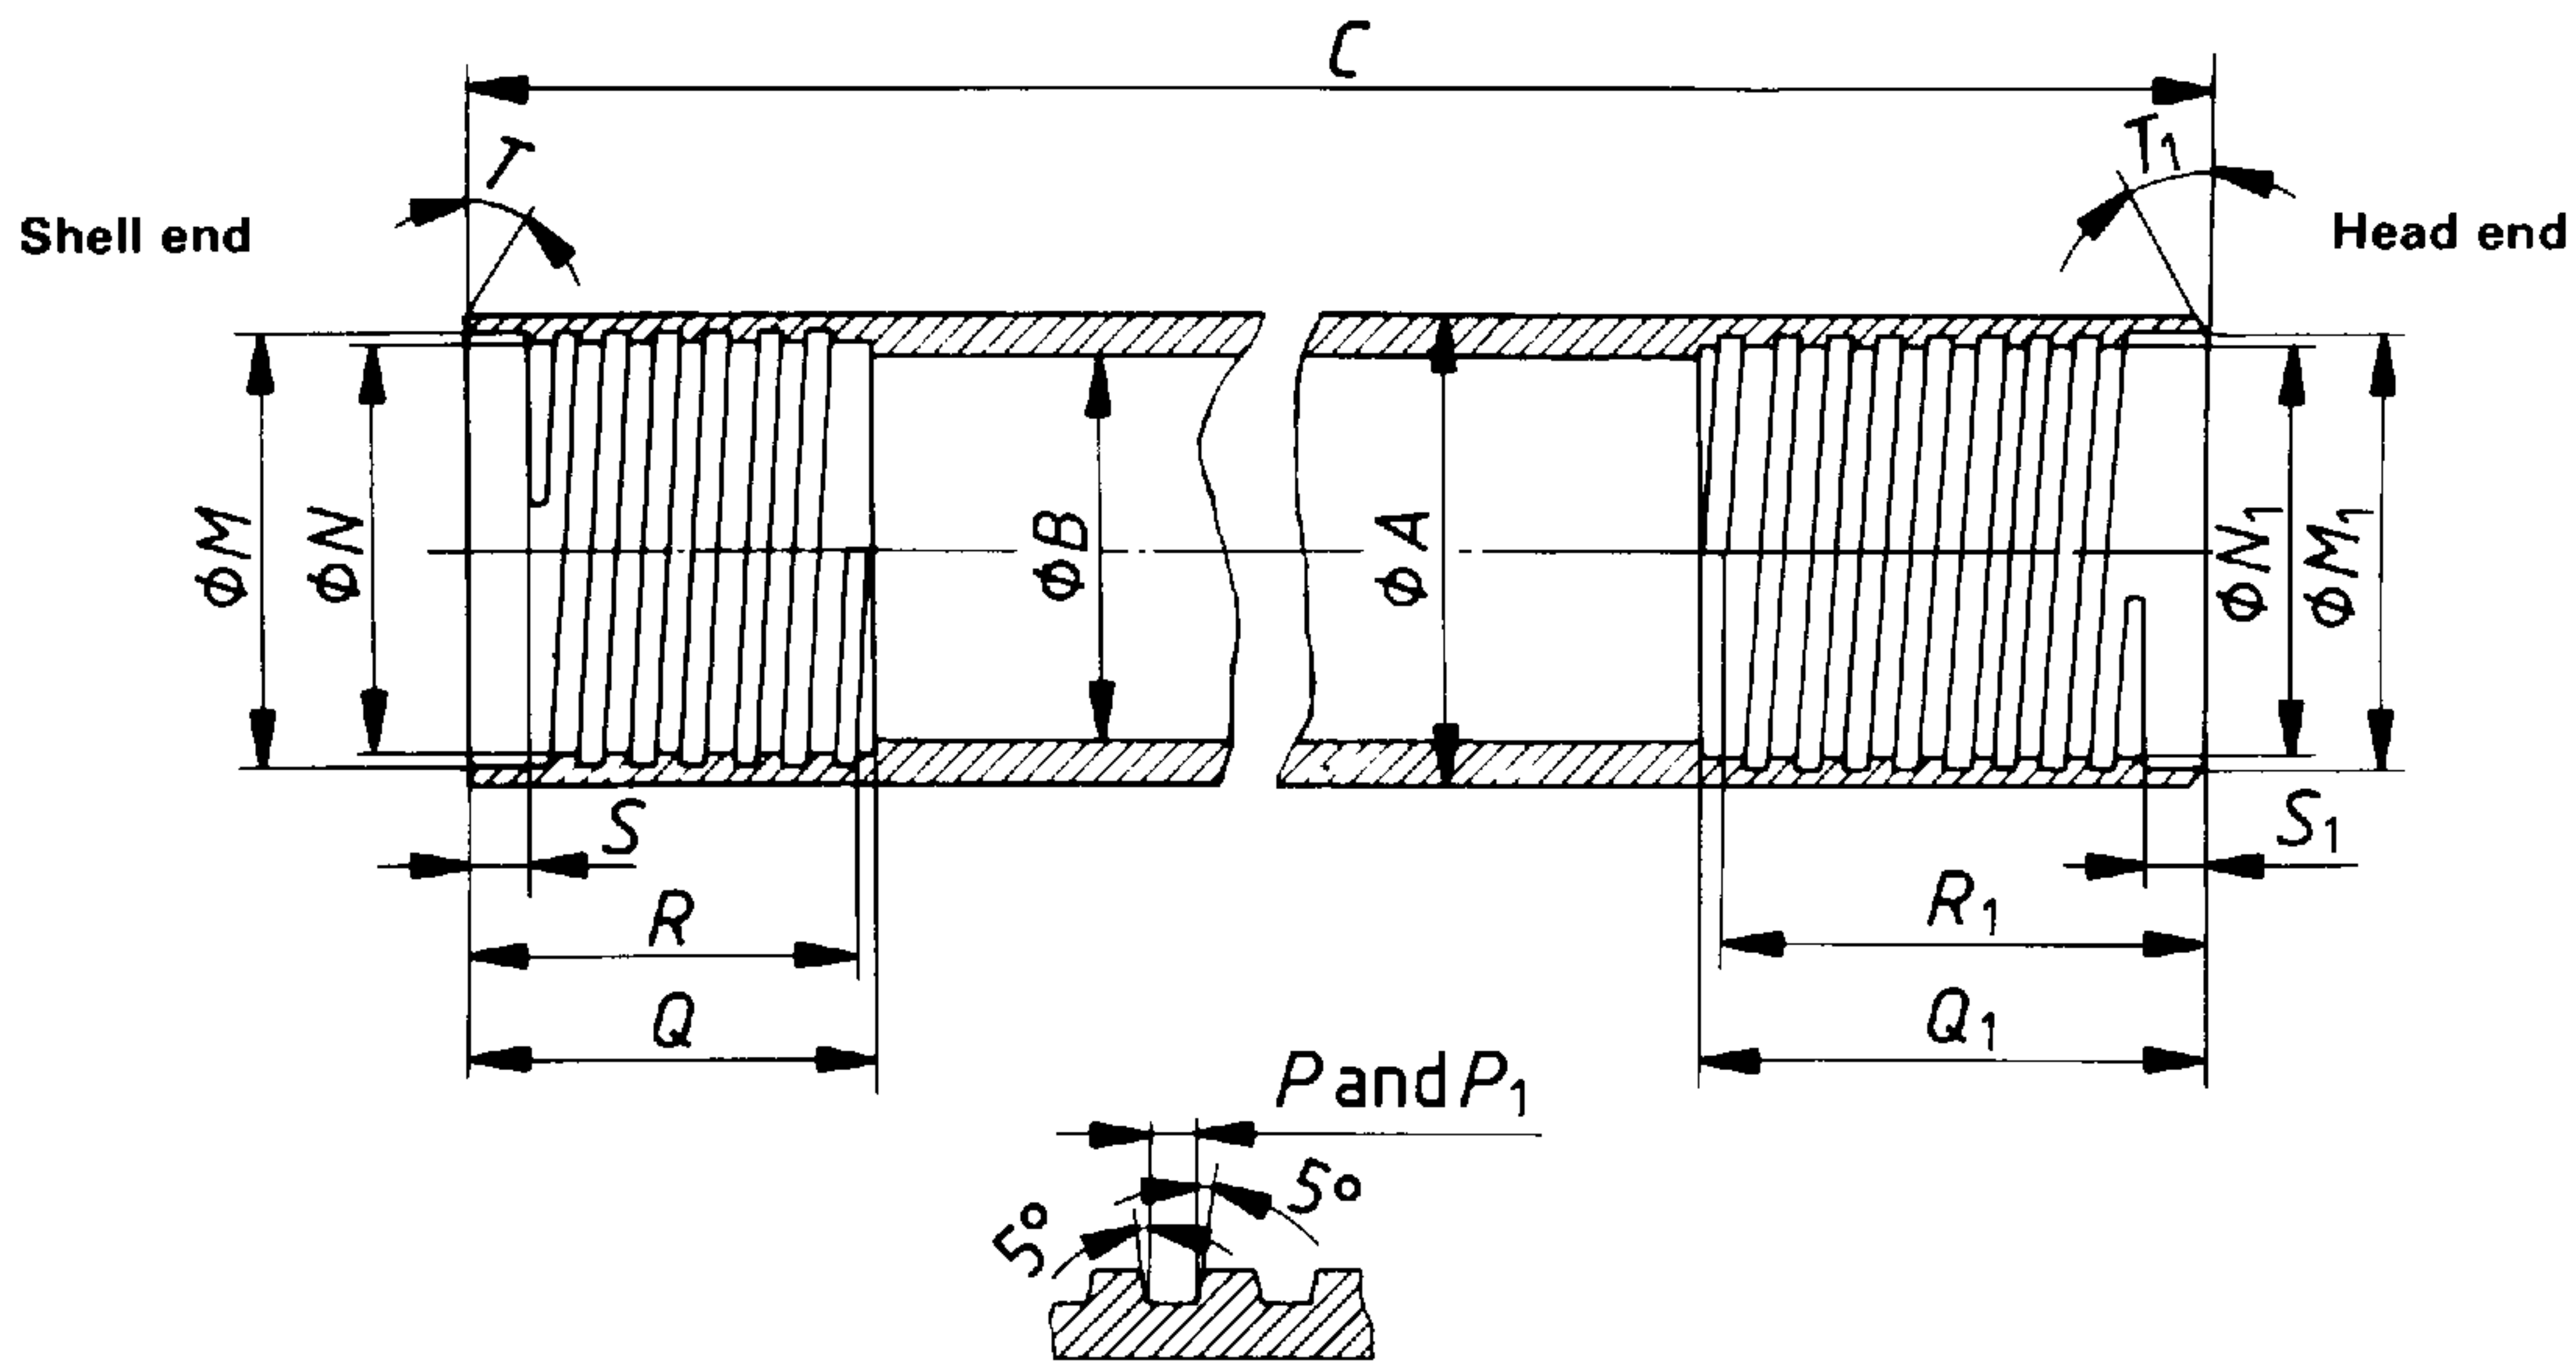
“WT” design double-tube core barrel – Outer tube (see table 55)
